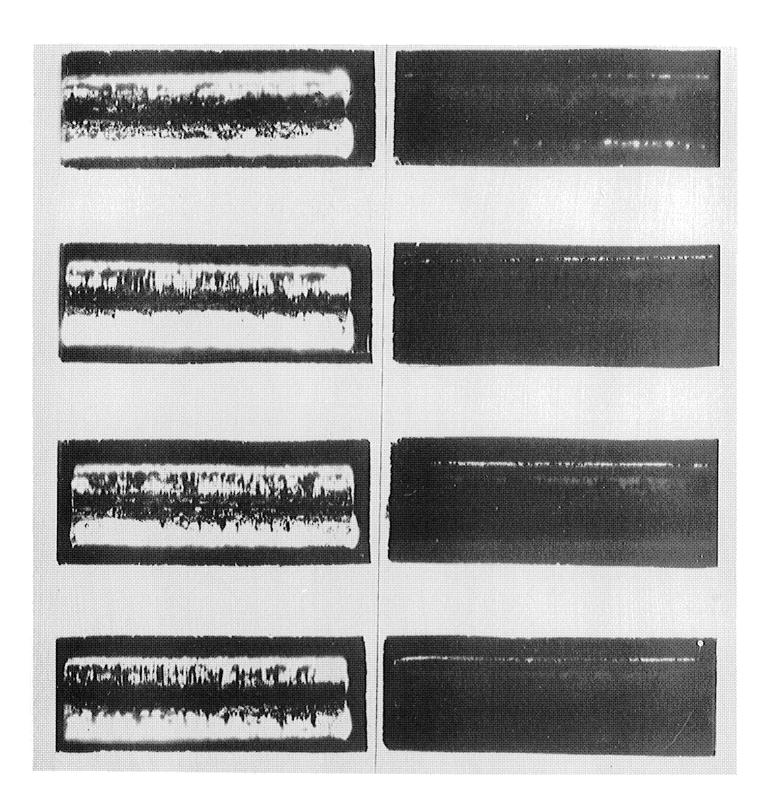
Planet Gear, 20 Hours with EP-80 Oil
